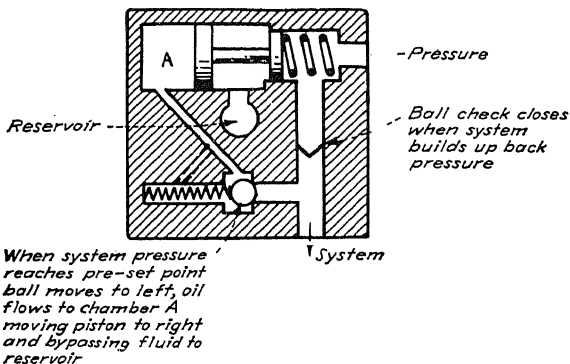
Unloading valve. (Courtesy of Product Engineering.)
